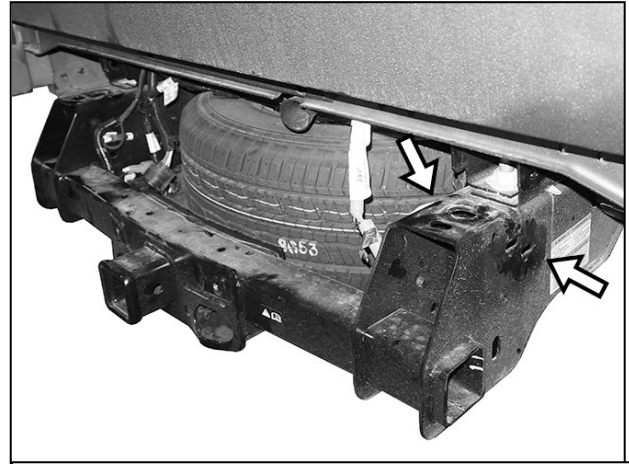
Reuse factory hardware to attach passenger/right Bumper to side of frame
